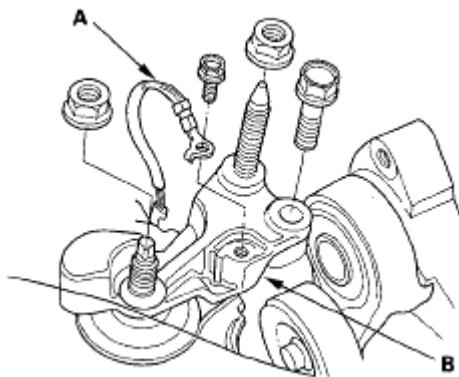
Identifying Upper Engine Mount Bracket & Ground Cable
